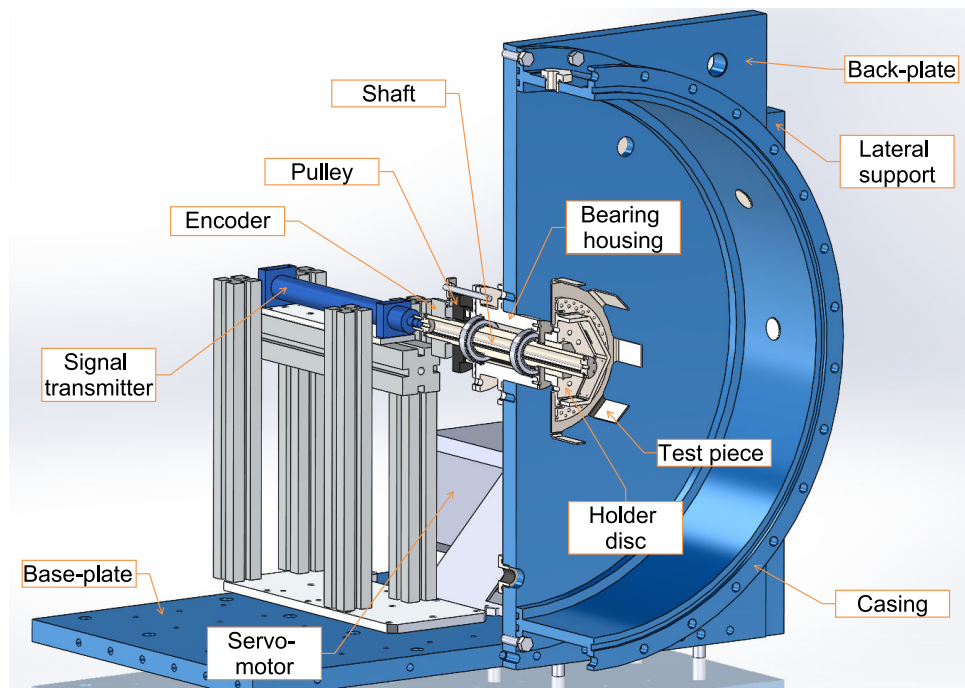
3D CAD drawing of the rig assembly: section view.
